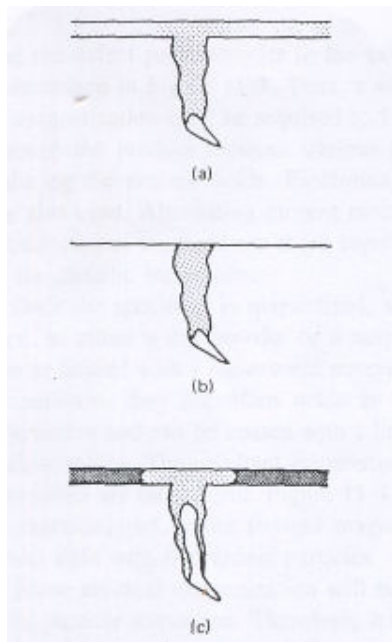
Liquid penetrant testing: a) application of the penetrant to a clean surface; b) excess penetrant is removed; c) developer is applied and the product inspected.
